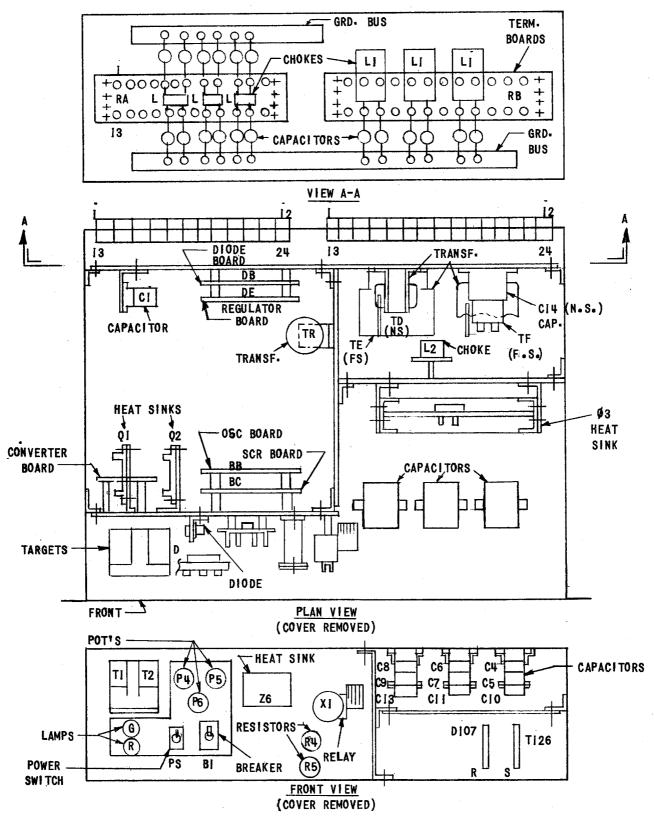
(0227A2190-0) SLC53B Component Location Diagram
